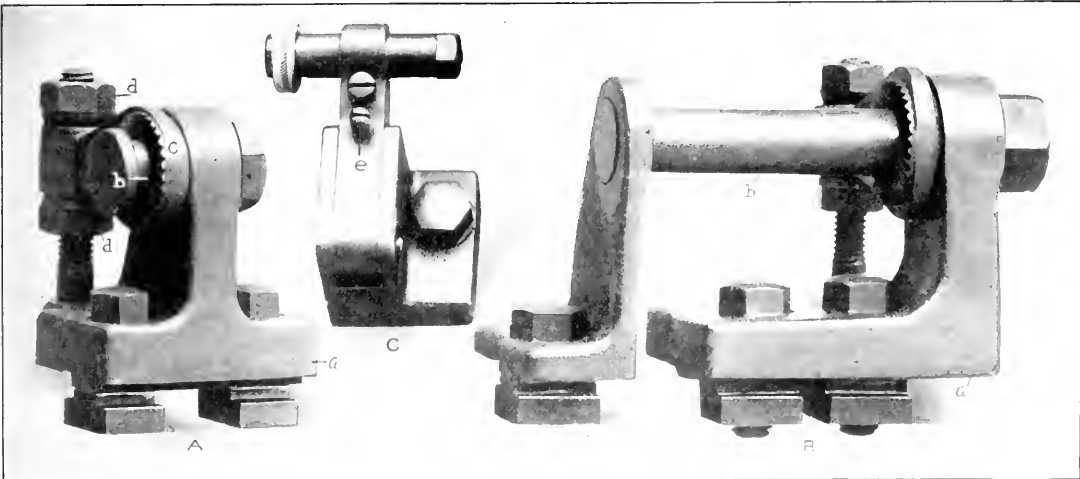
Tool-holders for carrying Circular Forming and Cutting-off Tools and a Cross-slide Knurling Tool-holder
